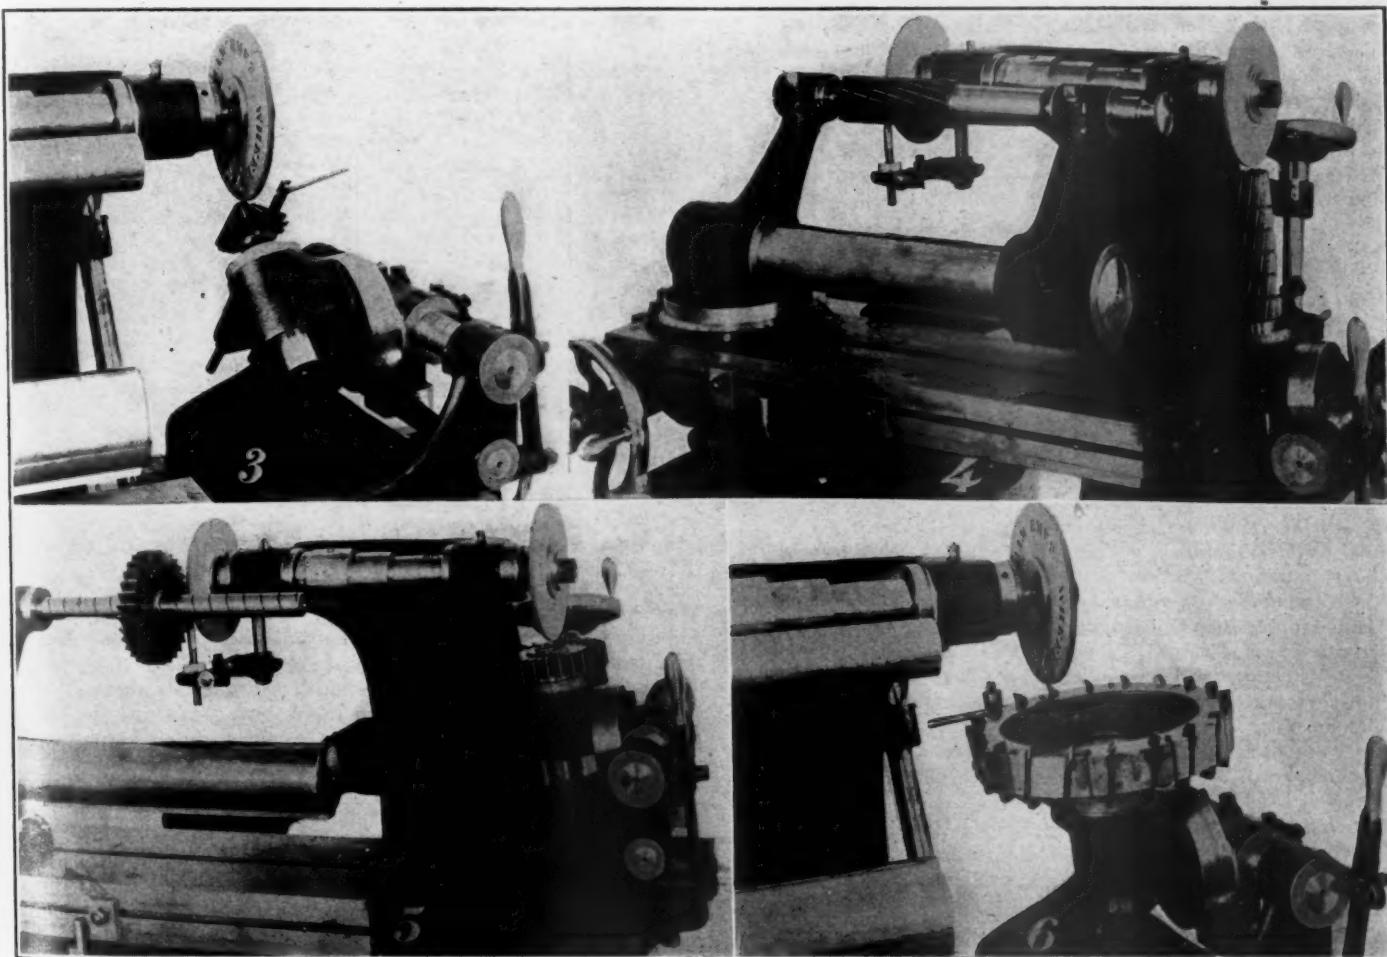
FRONT VIEW OF SLIDING HEAD GRINDING BEVEL CUTTER.
